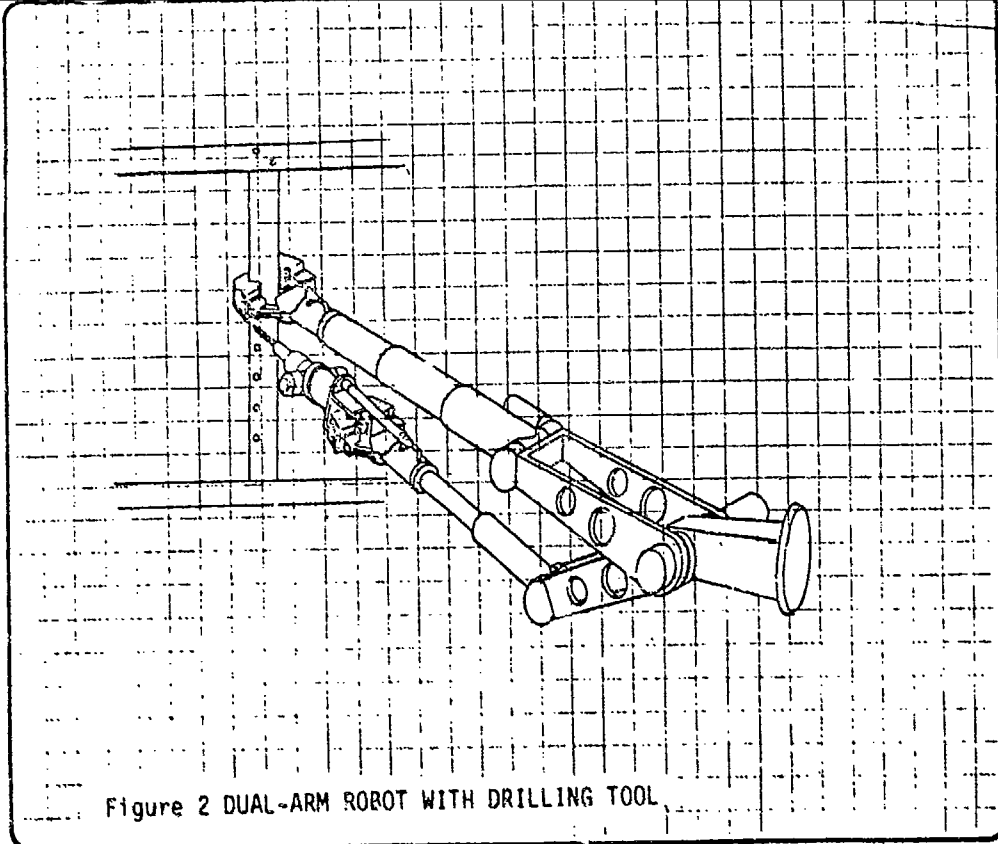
DUAL-ARM ROBOT WITH DRILLING TOOL
